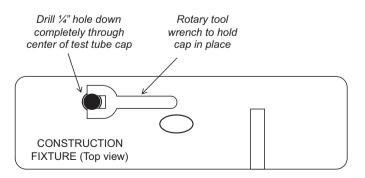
B3 Cut one-quarter inch hole through test tube cap.
